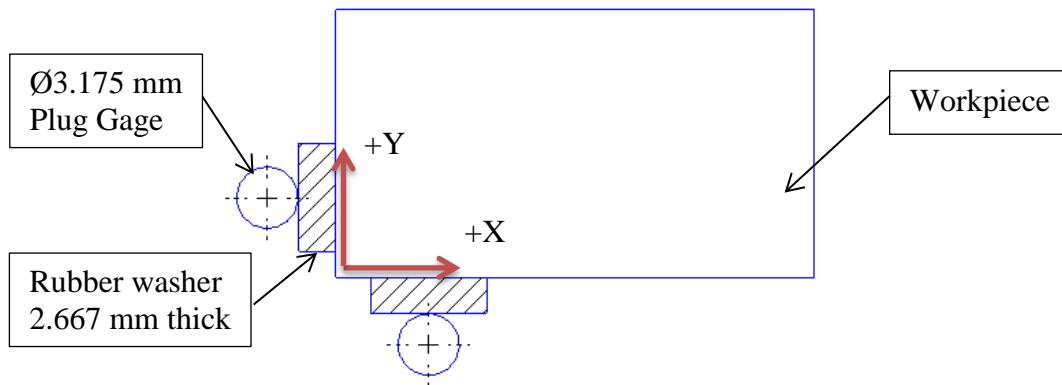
Setting X and Y Offsets Using the Plug Gage.
